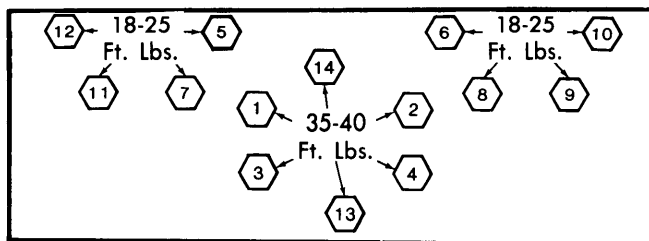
Exhaust Manifold Tightening Sequence (4.1L Engine)
